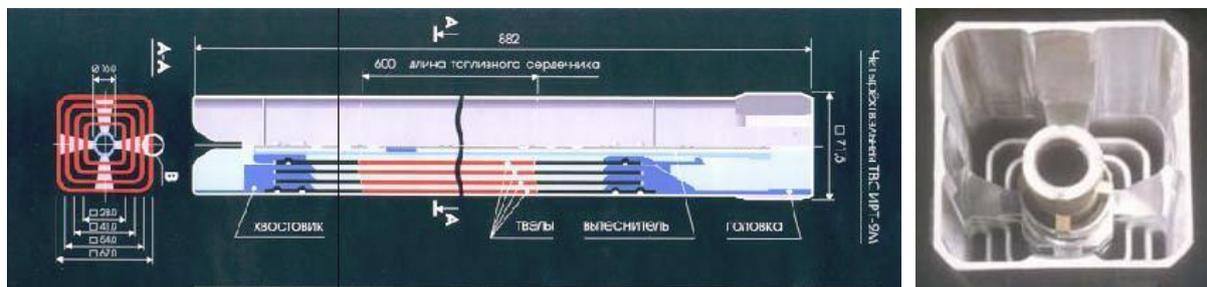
The IRT-2M Fuel Assembly, showing details of the square tubes on the right.
